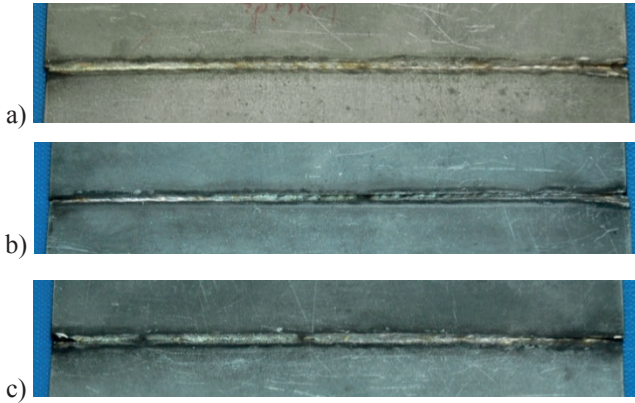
A view of the weld face (top surface) of the test joints of 0.8 mm thick electro-galvanized steel sheet
